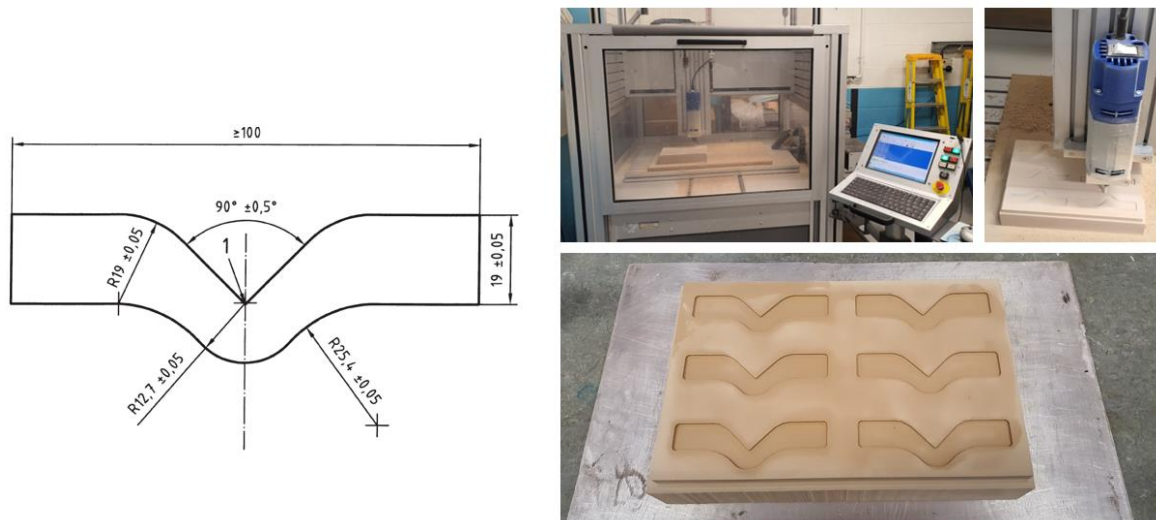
Process of mould manufacturing for preparation of tearing test specimens by CNC machining of resin tooling board.
